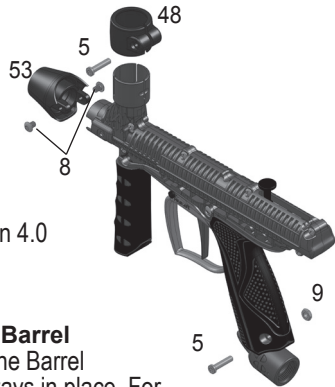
Feed Elbow, Barrel Adapter, and ASA
